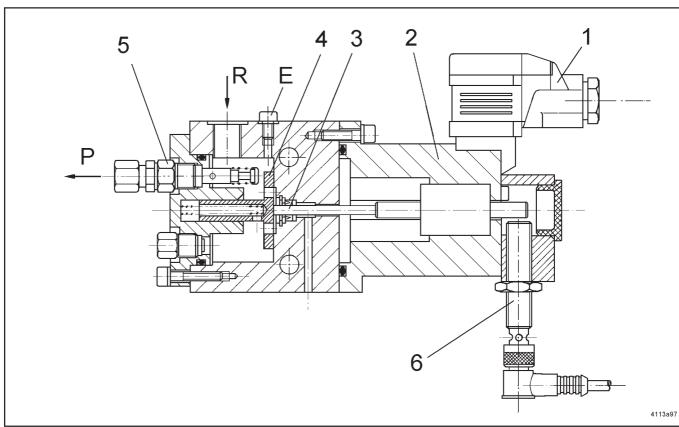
Sectional drawing of the PMA - 1 magnetic pump
